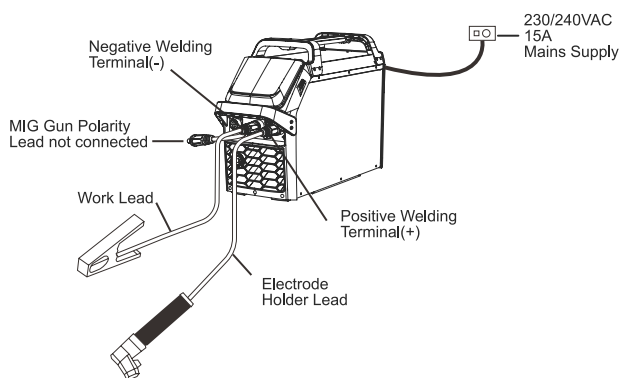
Setup For STICK (MMAW) Welding
